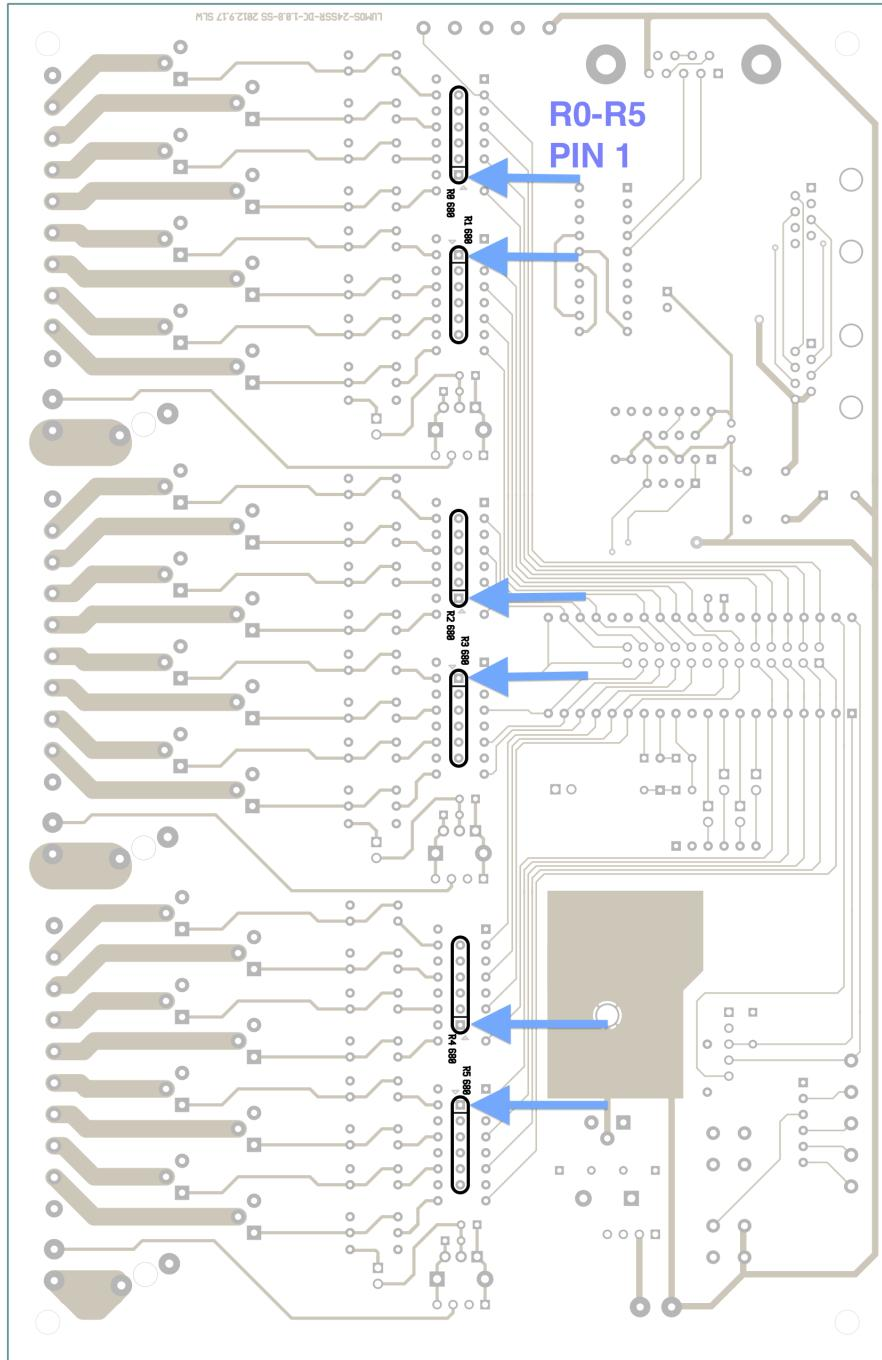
Lumos Board Parts Placement (Reverse Side)
